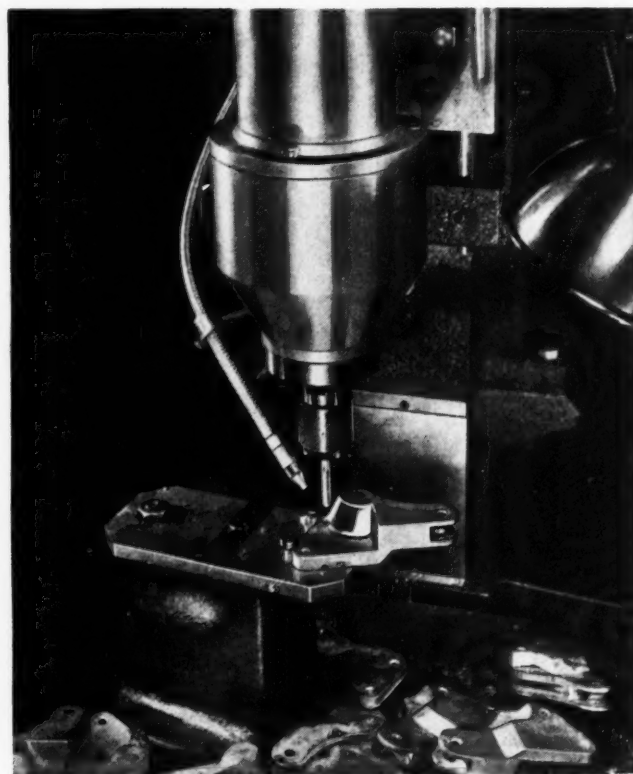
Inexpensive Swing Fixture Having a Slotted Plate with Two Screws Acting as Hold-down and Stops. Slot Locates Each of the Two Holes. The Irregular-shaped Casting is so Quickly Handled that 980 Pieces are Finished an Hour, Tapping Two 5/16-18 Holes 3/8 Inch Deep in Each. Revolutions per Minute of Tap, "In," 1750; "Out," 3500
